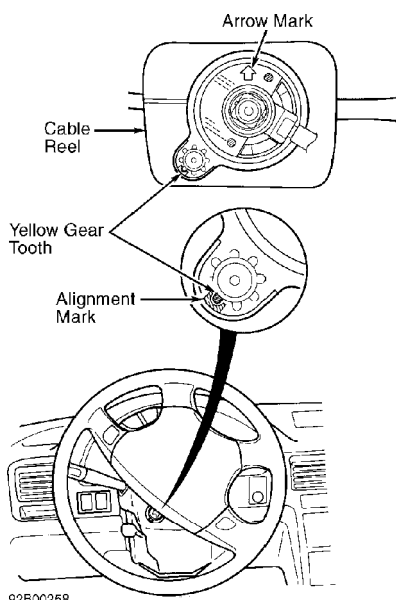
Locating Cable Reel Alignment Marks (Typical)
